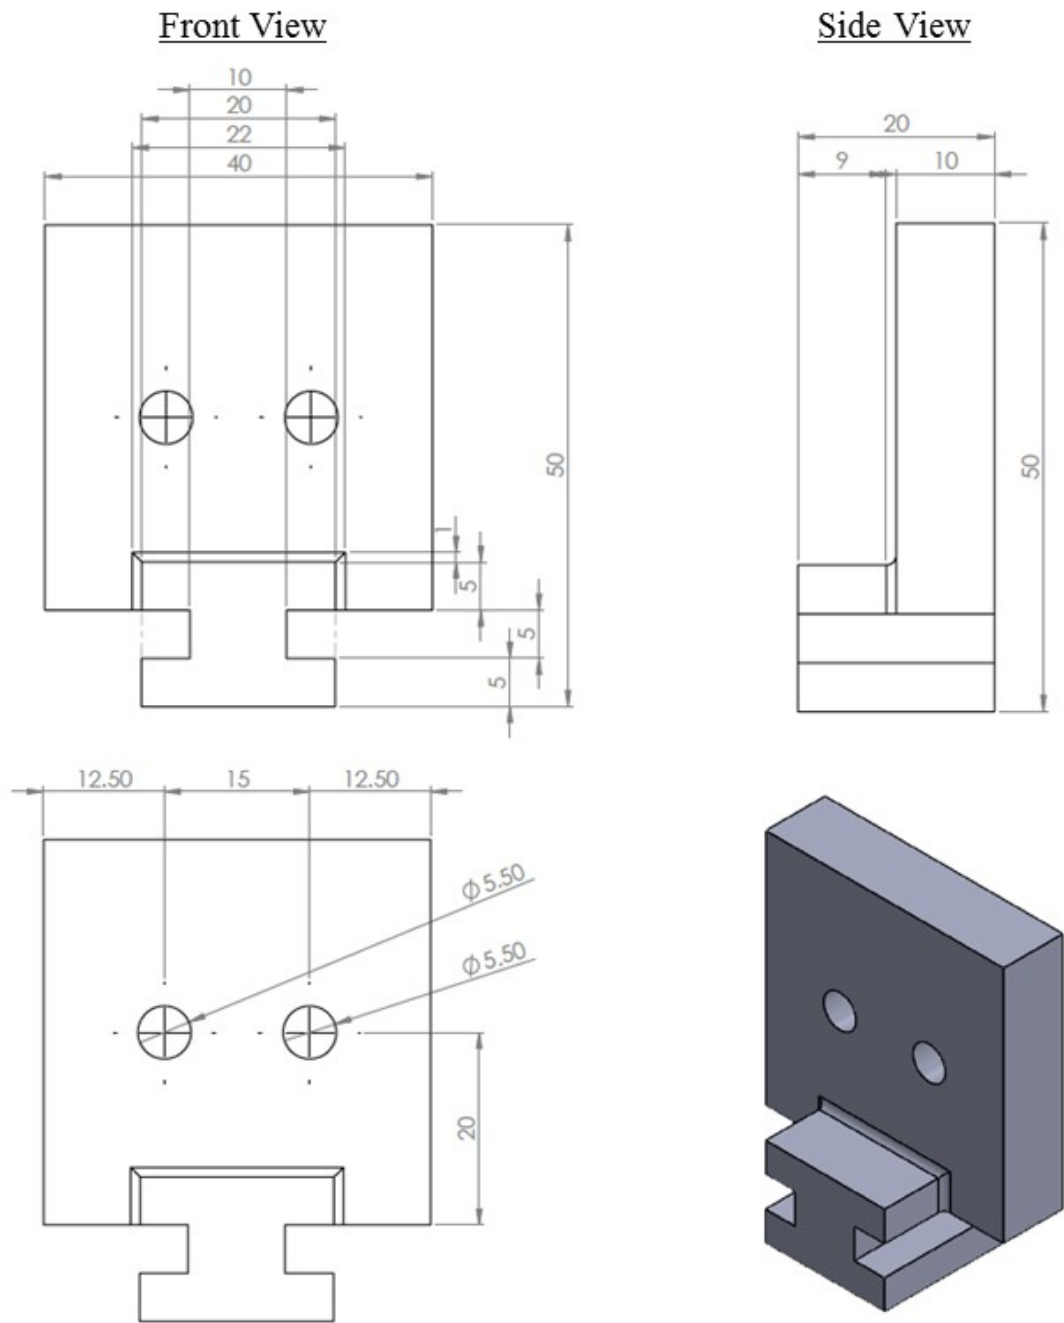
Dimensions of part B of the clamp assembly, from the front view and side view.
